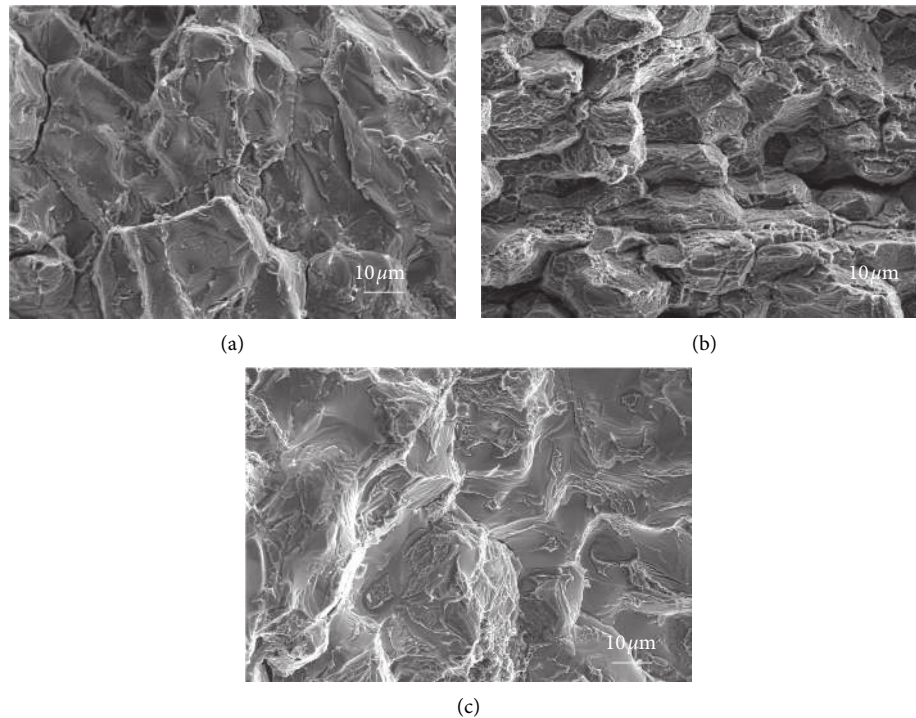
SEM morphology of the fracture surface of ZrB<sub>2</sub>/7055 welded joints. (a) Pure 7055 welded joint. (b) 1.5 wt.% ZrB<sub>2</sub>/7055 welded joint. (c) 3.0 wt.% ZrB<sub>2</sub>/7055 welded joint.
